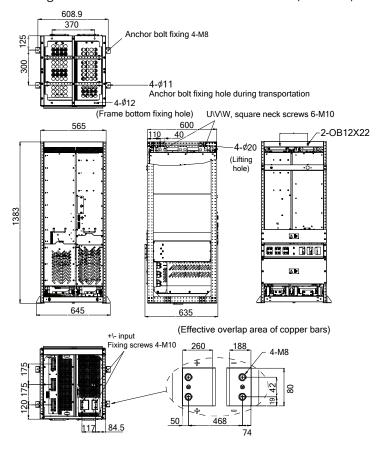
Installation dimensions of A8 unit fast connector (unit: mm)
